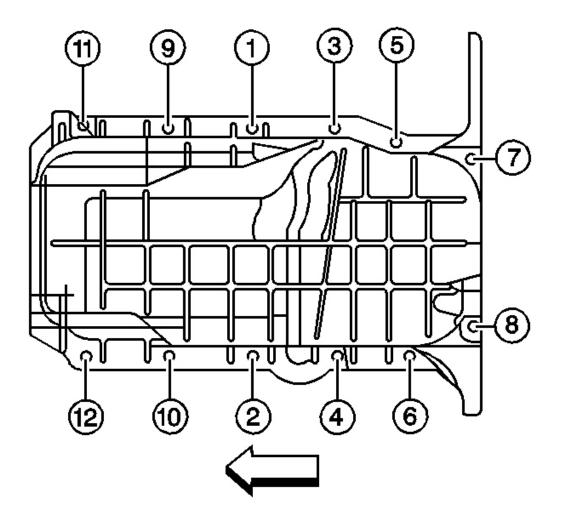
Oil Pan Bolts & Nuts Tightening Sequence Courtesy of GENERAL MOTORS CORP.
